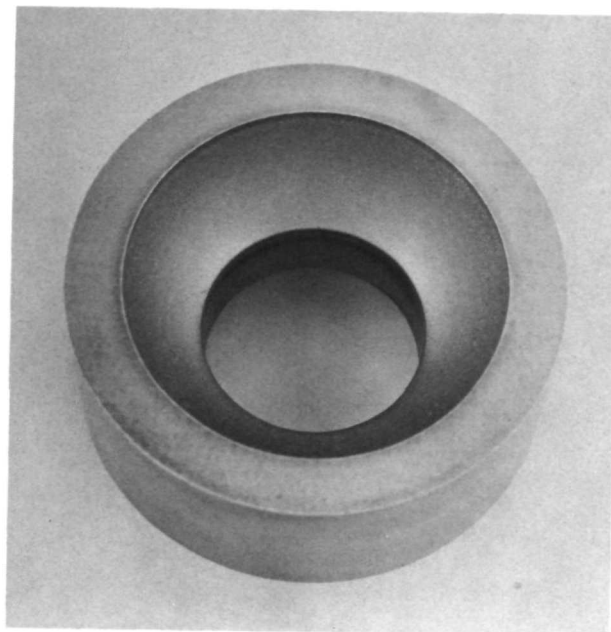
Bearing as diamond ground and electrodischarge machined.
